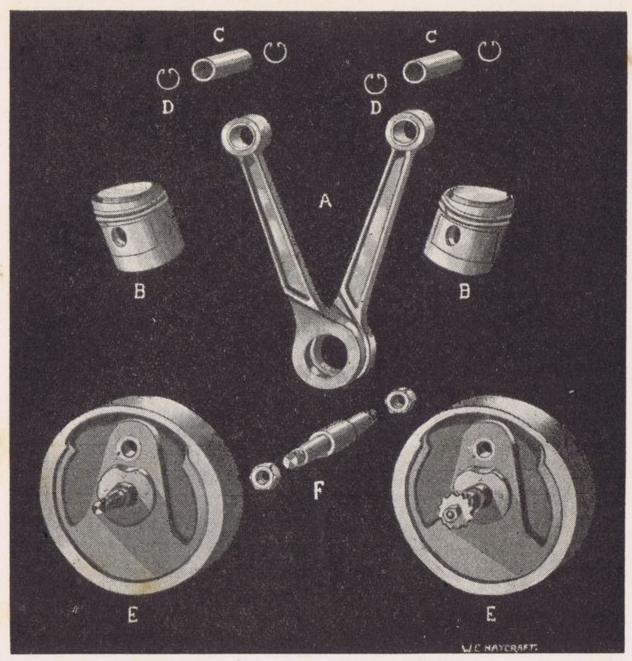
THE "SILVER ARROW" CRANKSHAFT ASSEMBLY
